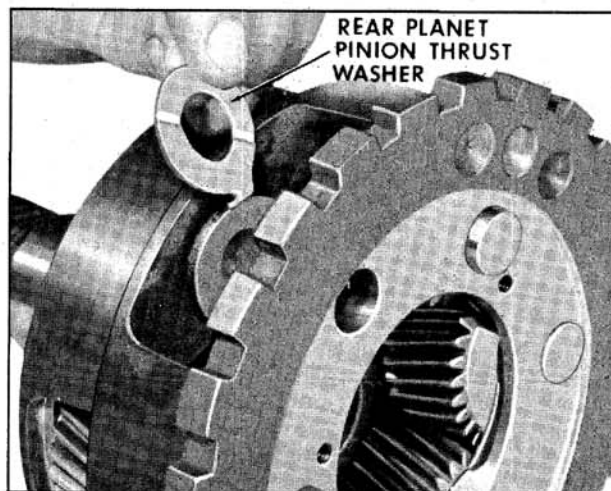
Installing Rear Planet Pinion Thrust Washer
